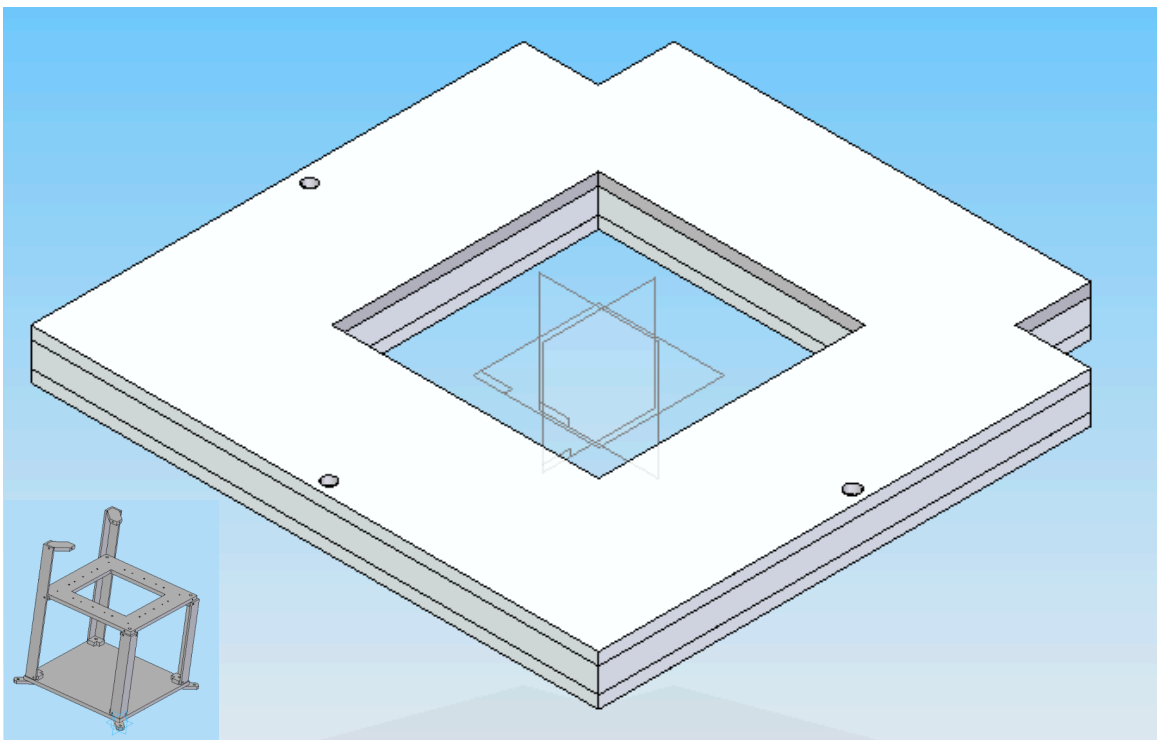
Burner Plate and Furnace Mounting Base (Inset)
